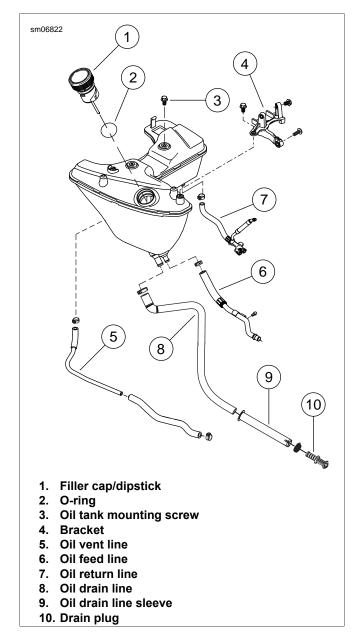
Engine Oil Tank Assembly: XR 1200X
